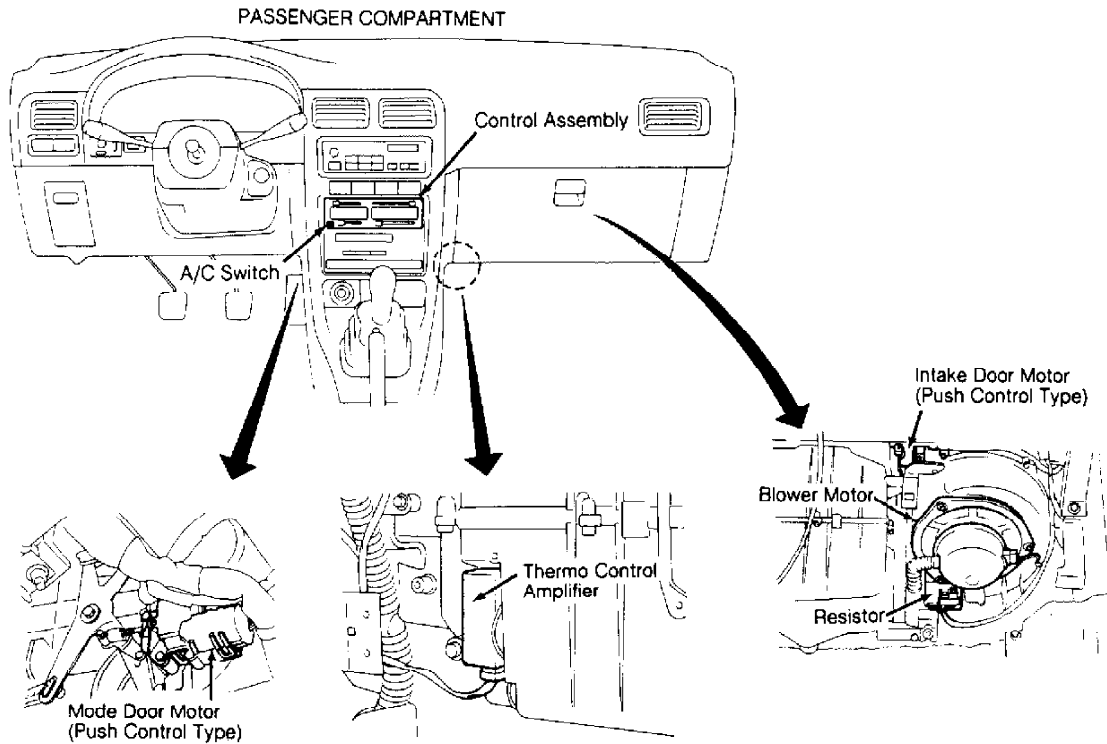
Locating System Electrical Components (Passenger Compartment)
